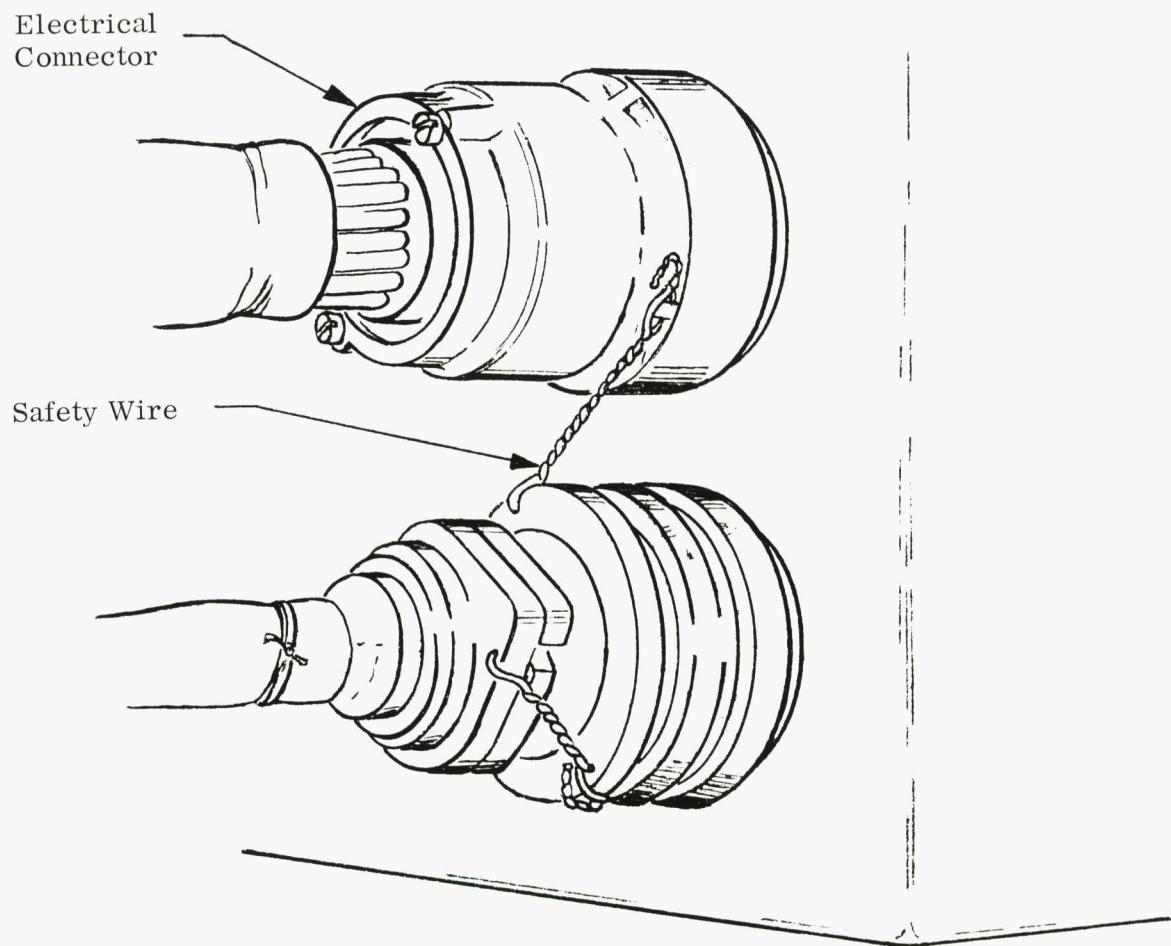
Typical Safety Wiring Installation for Two Connectors
